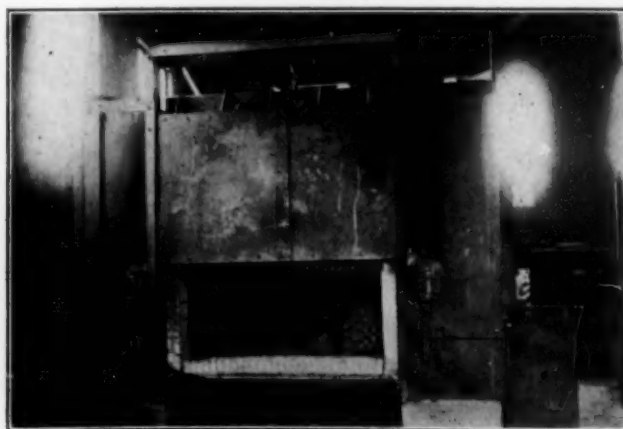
300 KW. CAR-TYPE ANNEALING FURNACE
